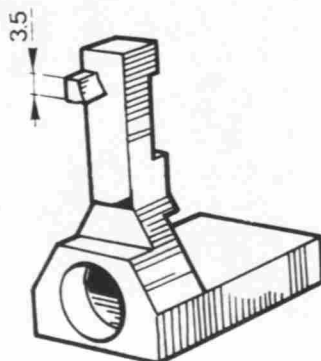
Citroen/Peugeot special tool for engine-running choke adjustments (Sec 4)
